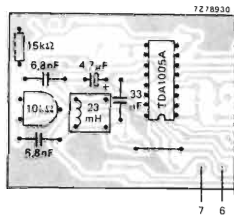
Printed-circuit board component side, showing component layout of Fig. 17.
